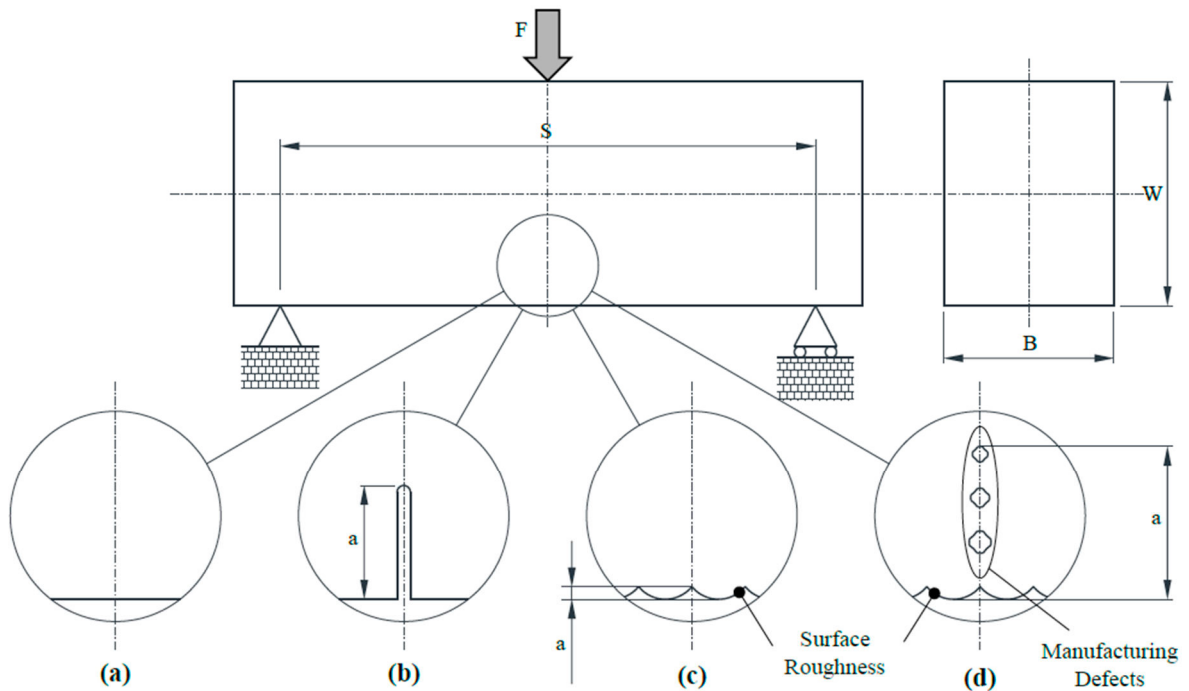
3D-printed specimens tested under three-point bending: plain specimen (a); specimen containing a saw-cut crack-like sharp notch (b); specimen weakened by surface roughness (c); specimen weakened by manufacturing defects (d) – (Alanazi et al., 2022).
